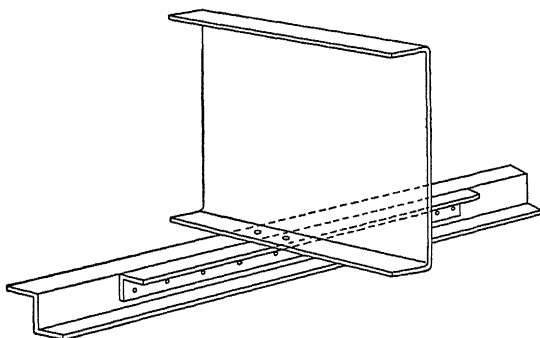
Stringer-reinforcing angle-section belt frame.
